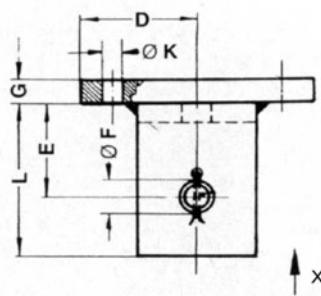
Concrete clevis plate, Fig. 52 Concrete rod attachment plate
